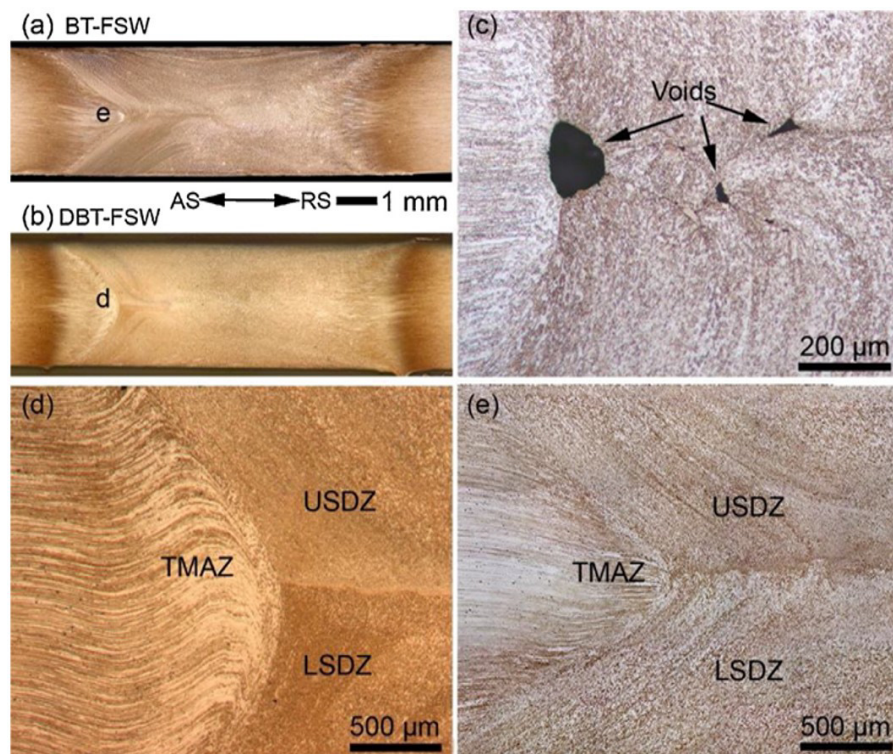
Optical macrographs of AA2198-T851 for a) Conventional bobbin tool FSW (BT-FSW) and b) Dual rotation bobbin tool FSW (DBT-FSW). c) Typical void formation in BT-FSW. d) Advancing side of BT-FSW and e) DBT-FSW where USDZ is upper shoulder dominated zone and LSDZ is lower shoulder dominated zone (AS: advancing side, RS: retreating side, TMAZ: thermomechanically affected zone) [173].
